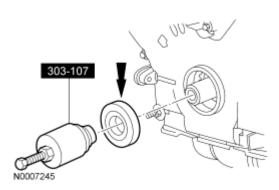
Removing Crankshaft Front Seal Using Special Tool Courtesy of FORD MOTOR CO.
